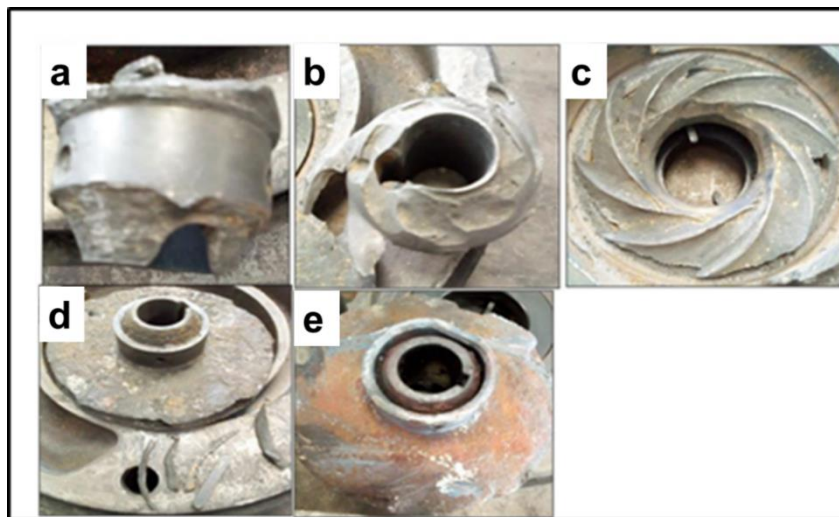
(a) 1st stage impeller, (b) 2nd stage impeller, (c) 3rd stage impeller, (d) 4th stage impeller, (e) 6th stage impeller
